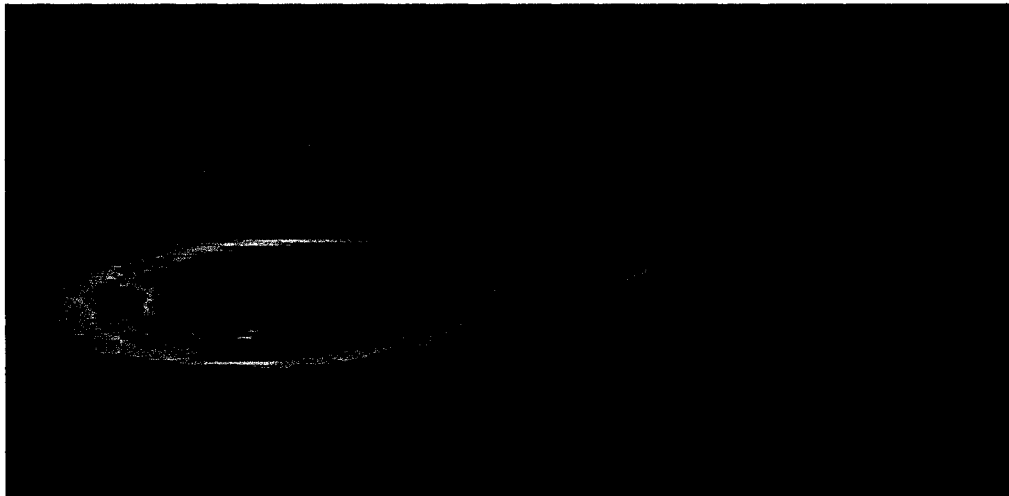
Weld Pool Shape with Ar-10% Hydrogen Plasma Gas
